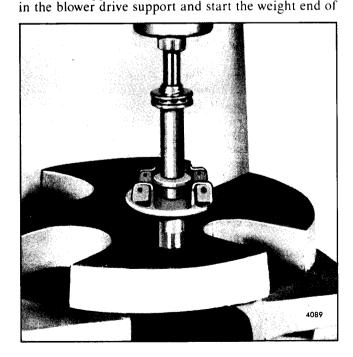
Installing Weight Carrier on Shaft using Tool J 8984
